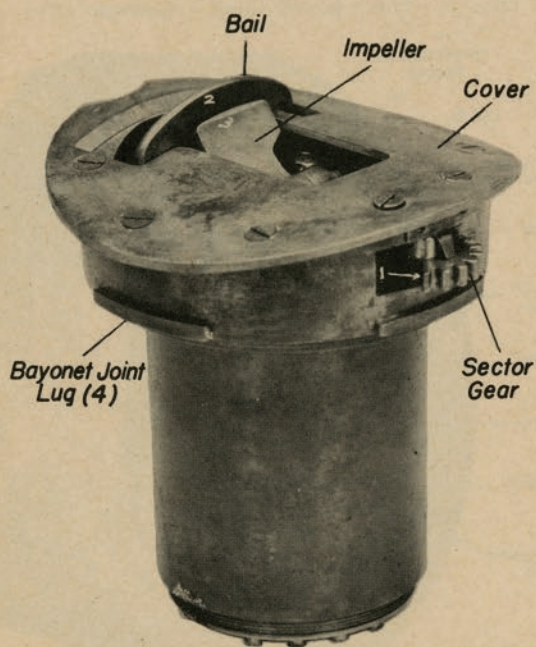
Type 3 Exploder, Booster and Center Ring Removed
